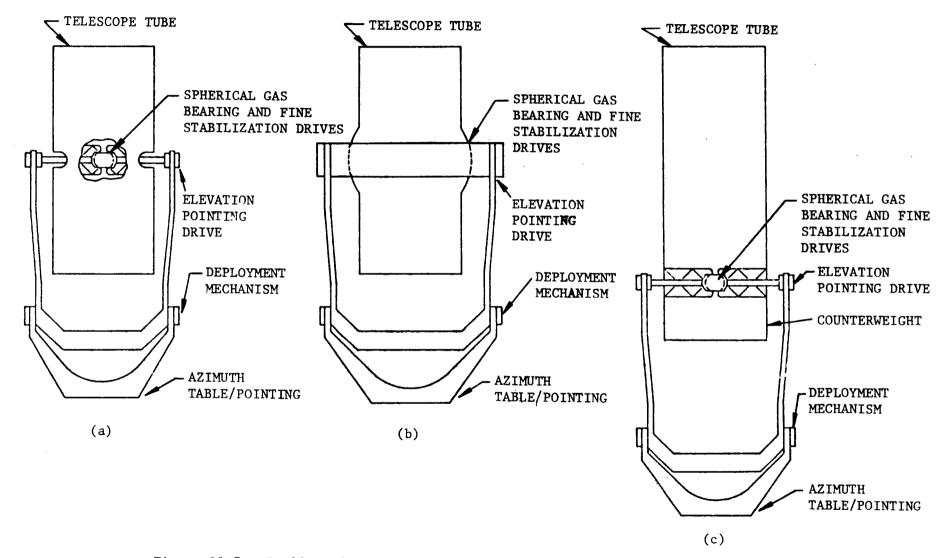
Small Angle Spherical Gas Bearing Configurations
